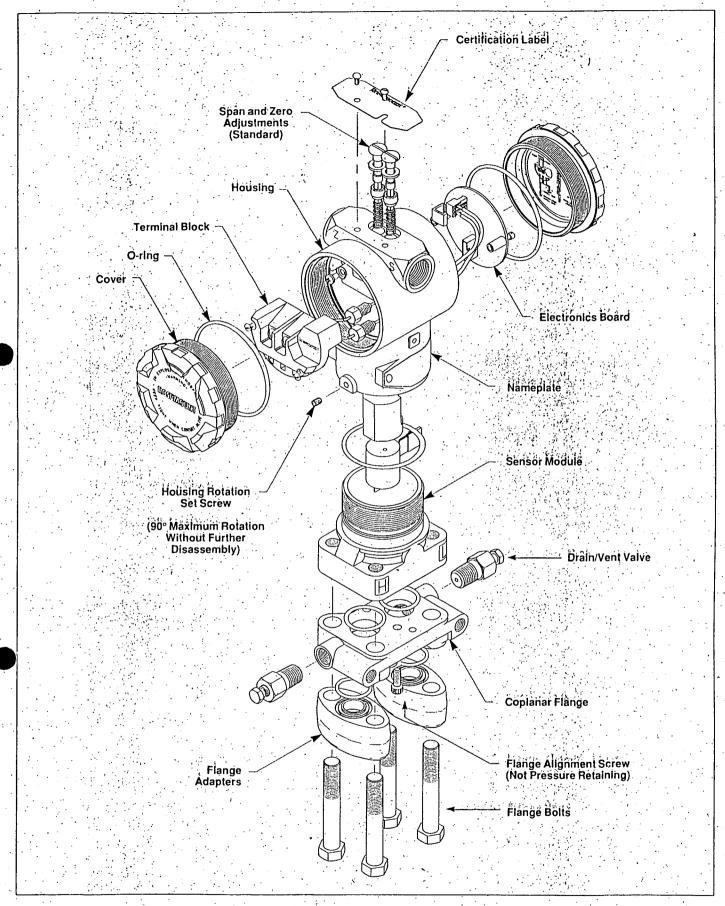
Model 3051C Differential Pressure Transmitter Exploded View
